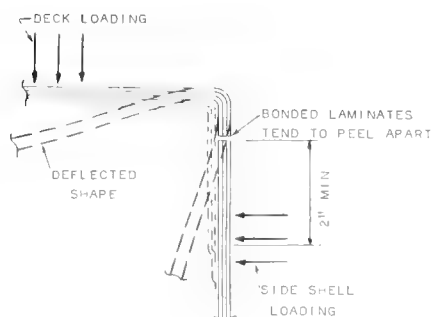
Deck Edge Connection - Normal Deck and Shell Loading Produces Tension at the Joint
